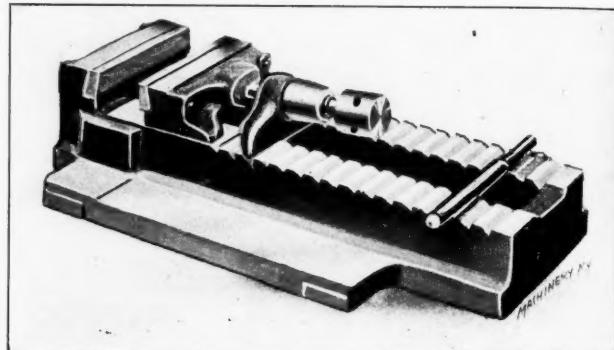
Taylor's Standard Pattern Machine Vise, with Adjusting Jaw Plates.
